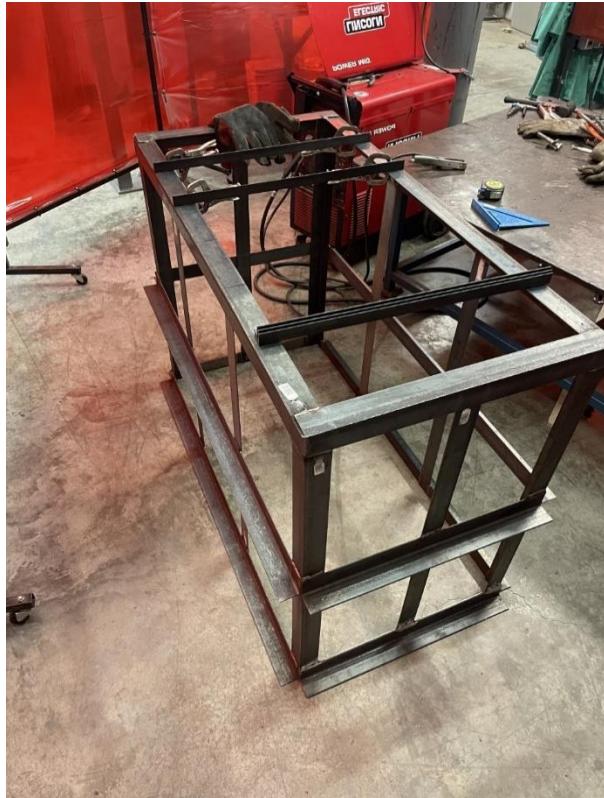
shows the process of welding on the side pieces of the flume. Proper cuts and measurements allowed us to mount and weld the pieces to create additional strength. Horizontal 2-inch x 2-inch angle will help decrease the flexibility in the structure of the flume. Adding the vertical piece of 3ft x 2-in flat stock will not only help with tying the steel together but will also keep the Lexan at the same level throughout the entire side. This is because the 1/8-in thick piece is on the same plane as the 2-in x 2-in angle on the corners.
